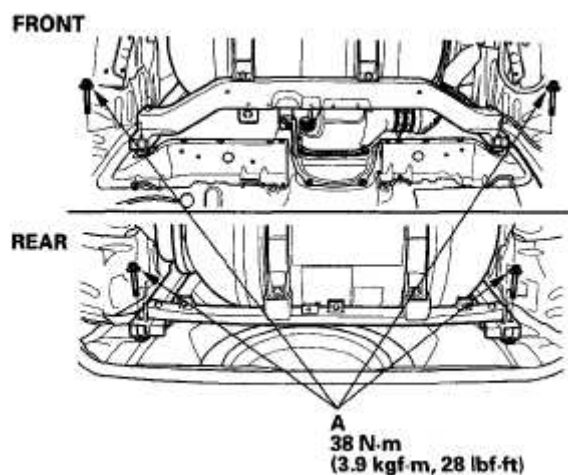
Identifying Tank Frame Mounting Bolts Torque Specifications
